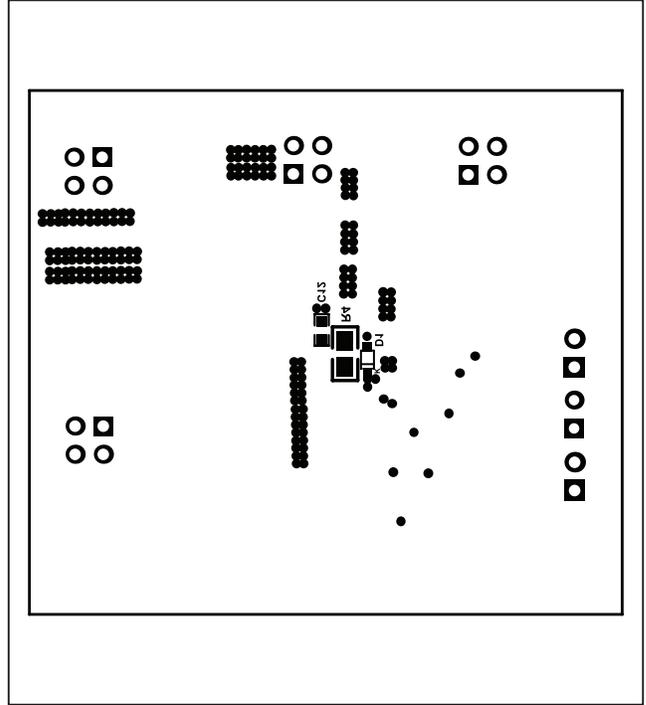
MAX15066 EV Kit Component Placement Guide—Solder Side
